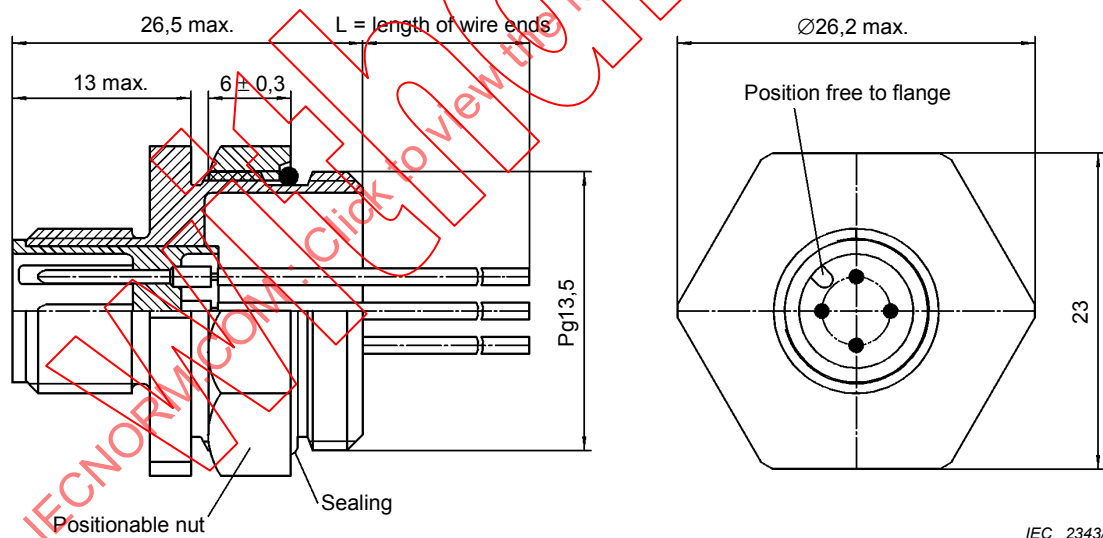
Fixed connector, with wire ends, single hole rear mounting Pg13,5, keyway orientation, male contacts
